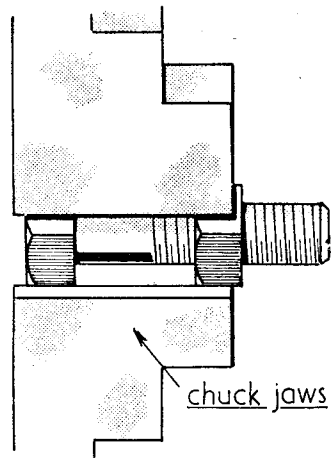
Method of gripping a hexagon bolt in the three-jaw chuck
